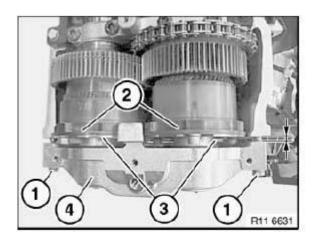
Identifying VANOS Adjustment Unit, Thrust Bearing Plates And VANOS Gears Courtesy of BMW OF NORTH AMERICA, INC.
